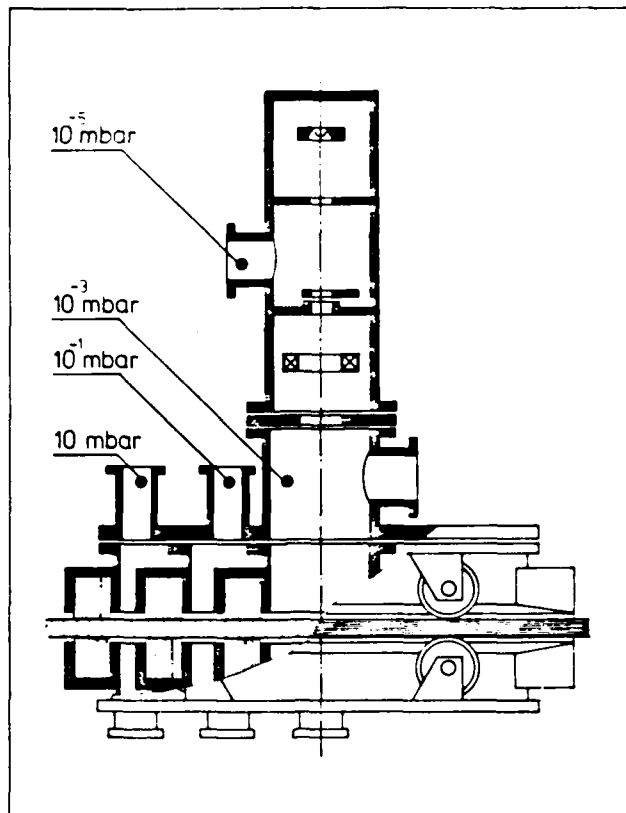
CROSS-SECTION OF STEIGERWALD MOBILE VACUUM SYSTEM
